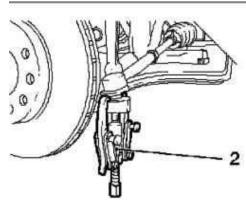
Extrusion tie rod from steering knuckle: 1, 2 - a special tool
